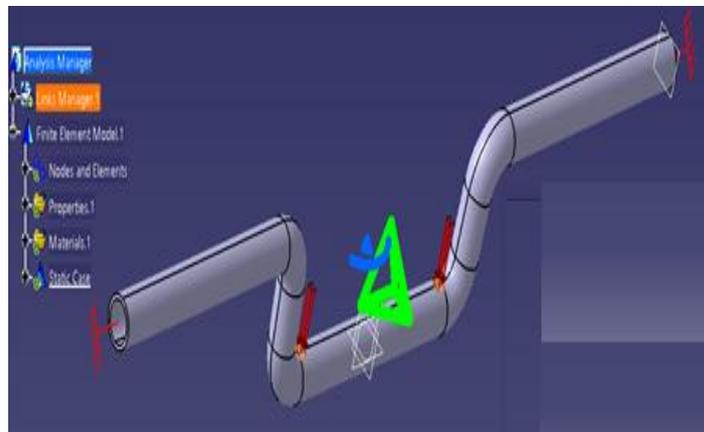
The schematic diagram for fastening the pipes in the upper and lower rams of the Instron testing machine
